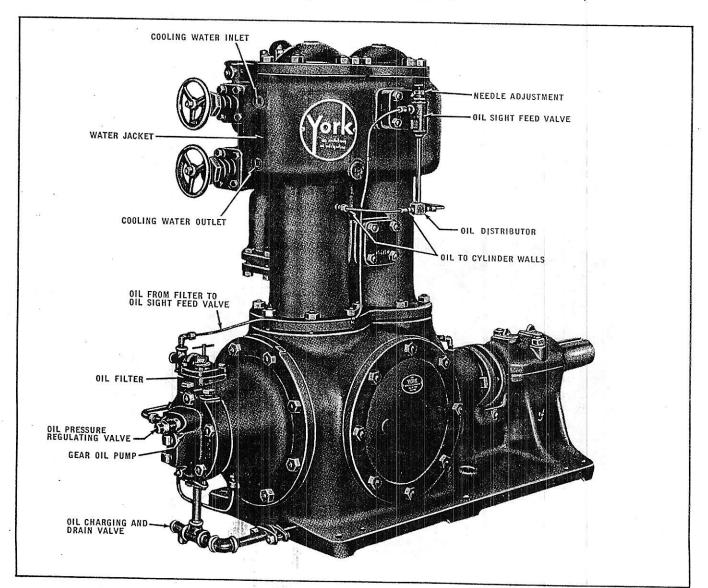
Cylinder Wall Lubrication - 6" to 9" Compressors
